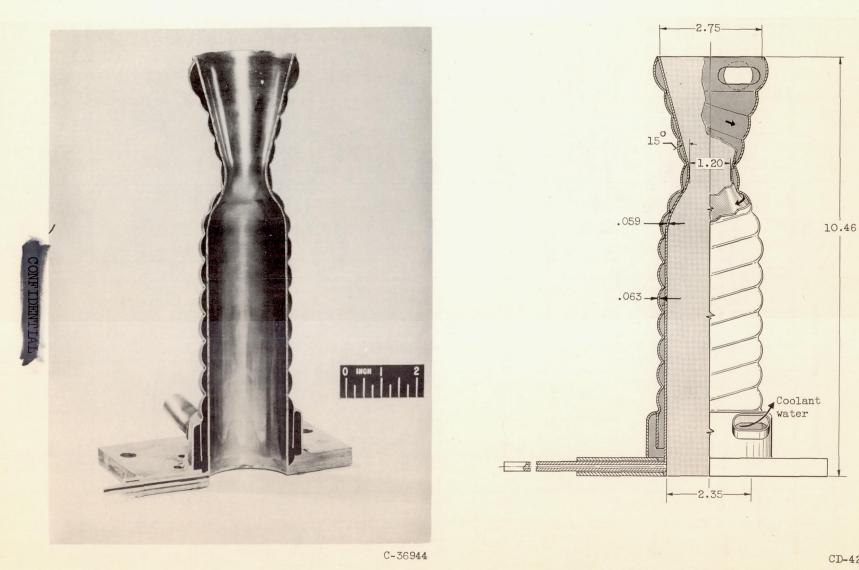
Cutaway section and diagram of chamber and nozzle of 1000-pound-thrust rocket engine. (Dimensions in inches.)
